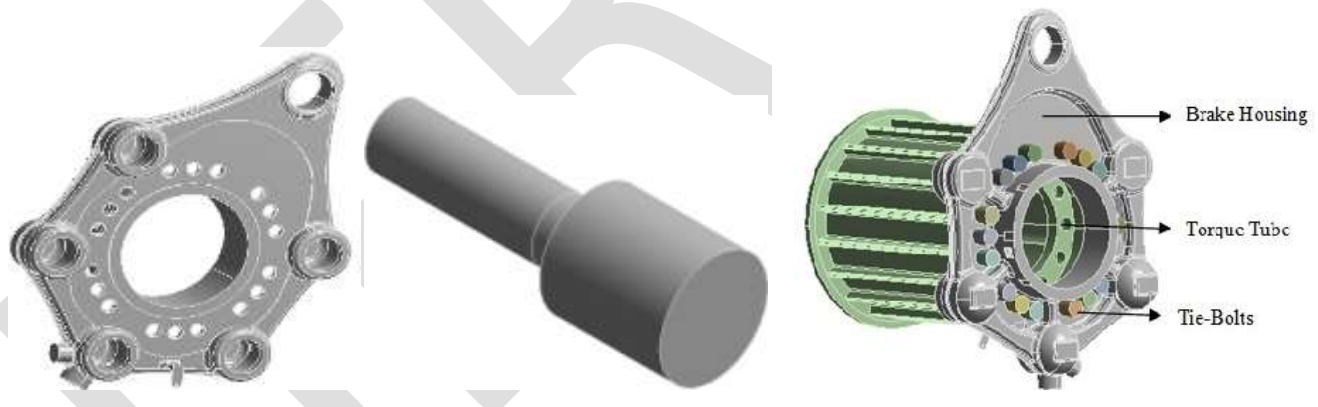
CAD models of Brake housing, Tie-Bolt & Assembly.
